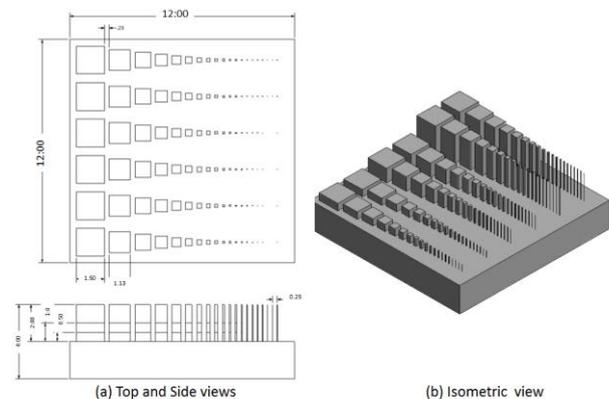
Drawing of the test part (a) Top& side views and (b) Isometric view (dimensions in mm)
